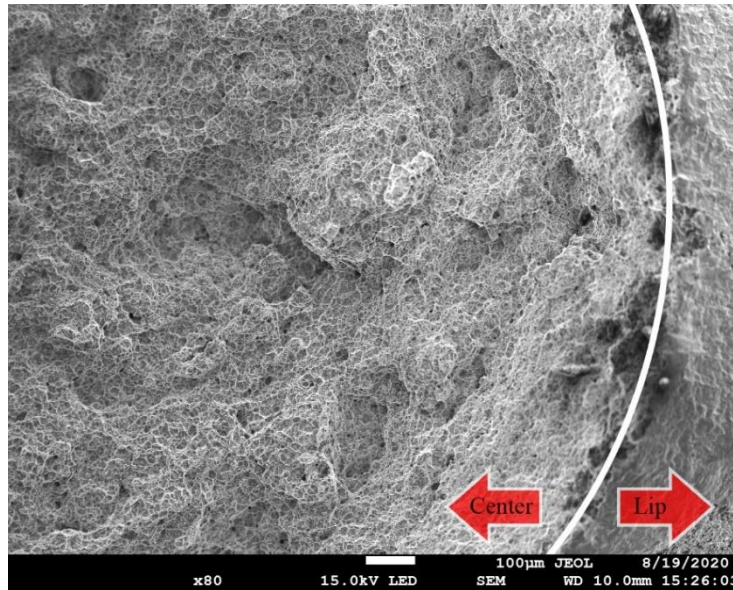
The fracture surface at the center of the mild steel tensile specimen has larger dimples than the shear lip.
